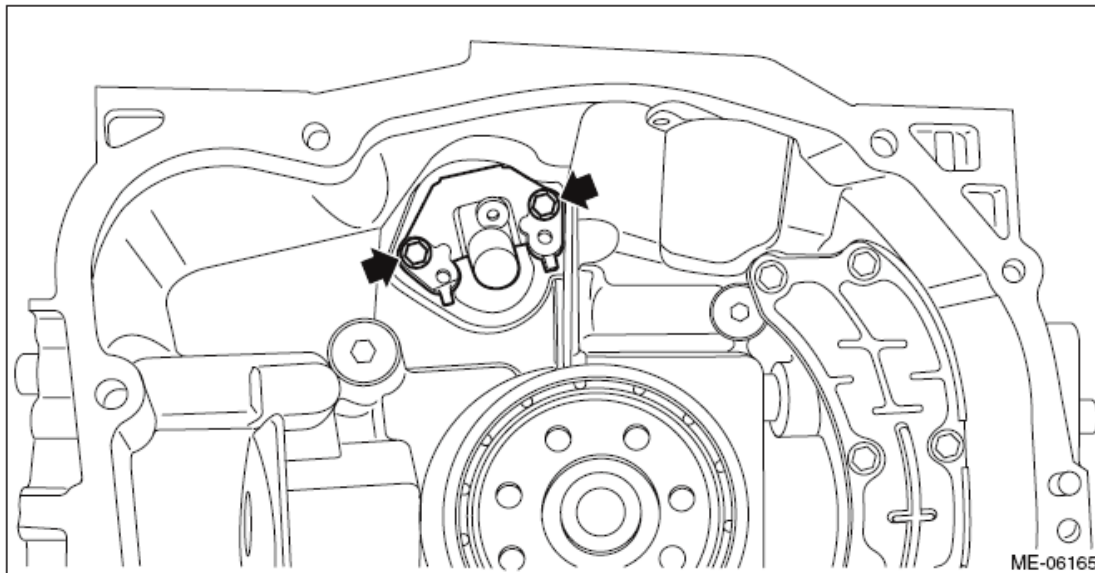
Locating Crankshaft Position Sensor Holder Bolts
